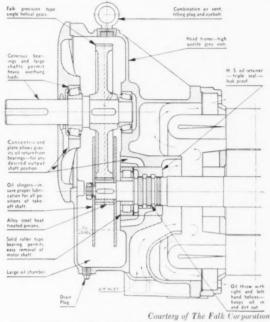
Showing details of the Falk geared-head Motoreducer. Note that provision is made for oil lubrication of both gears and roller bearings. By use of suitable oil retainers, entry of dirt or leakage of lubricant at the motor end is prevented.
